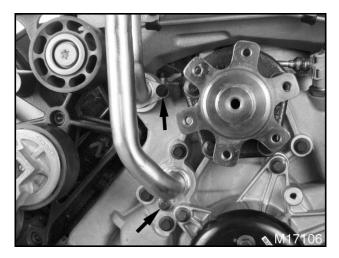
EGR coolant supply and EGR coolant return tube bolts
